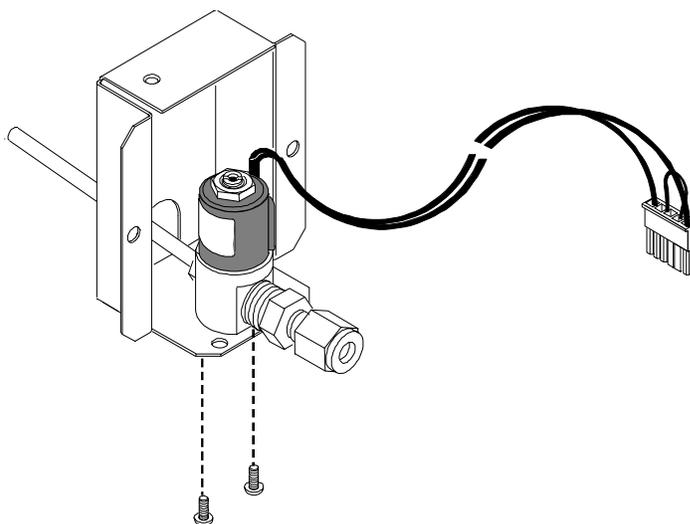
Removing the valve from the valve bracket (N₂ valve shown)
